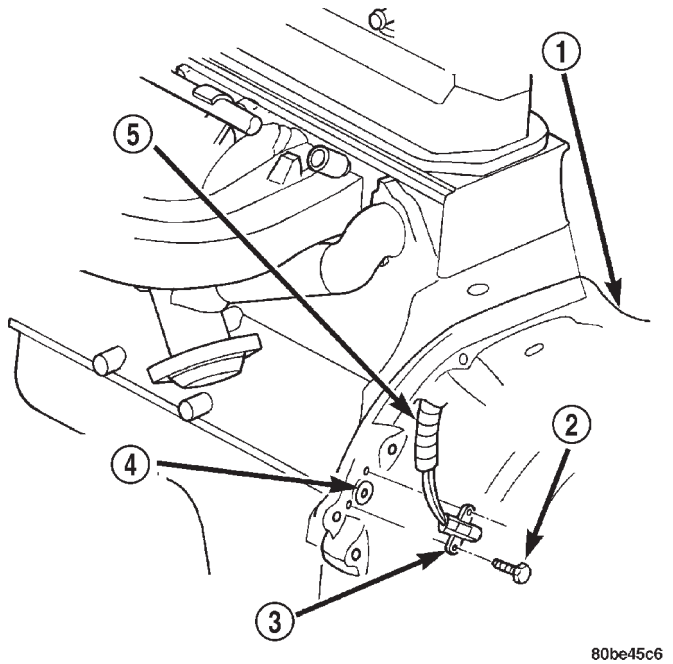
Crankshaft Position Sensor—Two-Bolt Mounting
